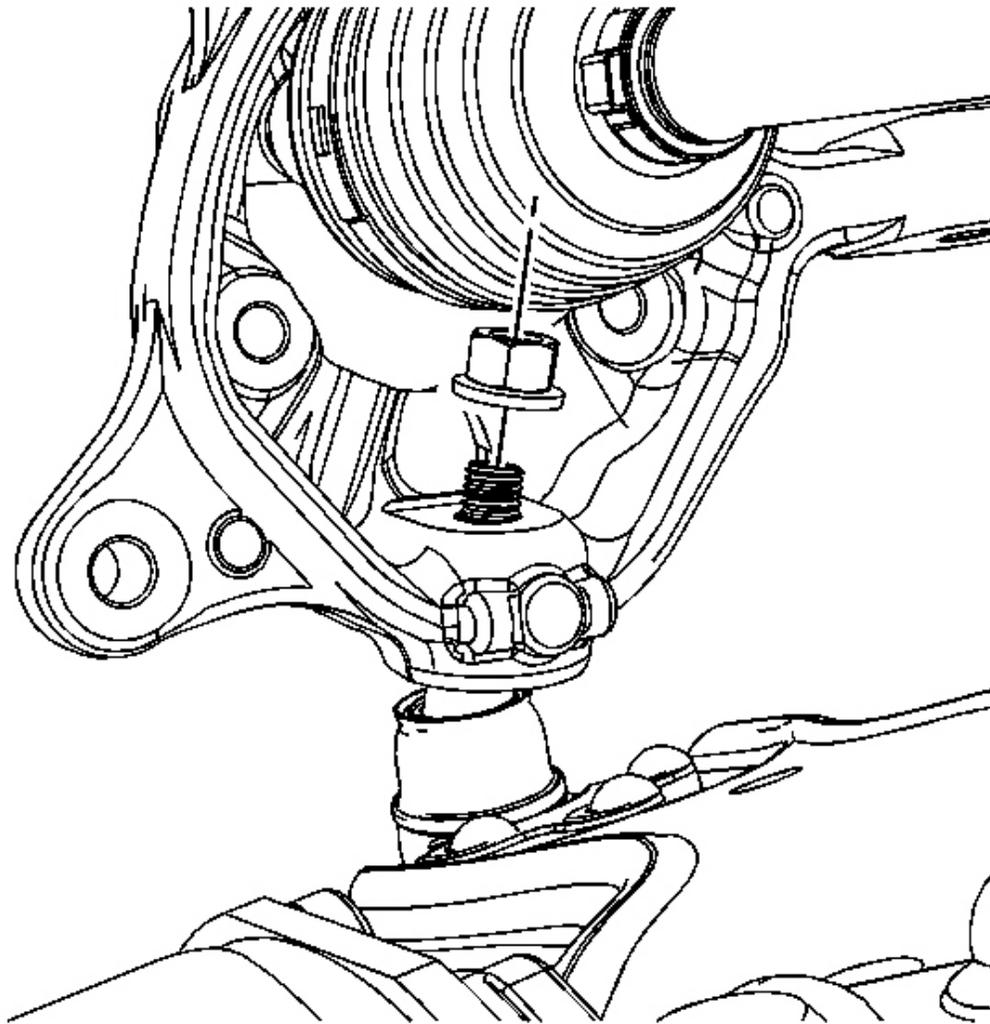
Identifying Lower Ball Joint Retaining Nut
